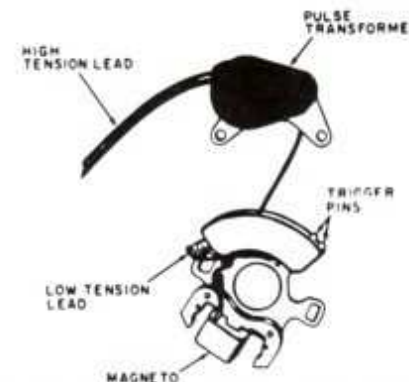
View of solid state ignition system used on some models not equipped with flywheel alternator.
